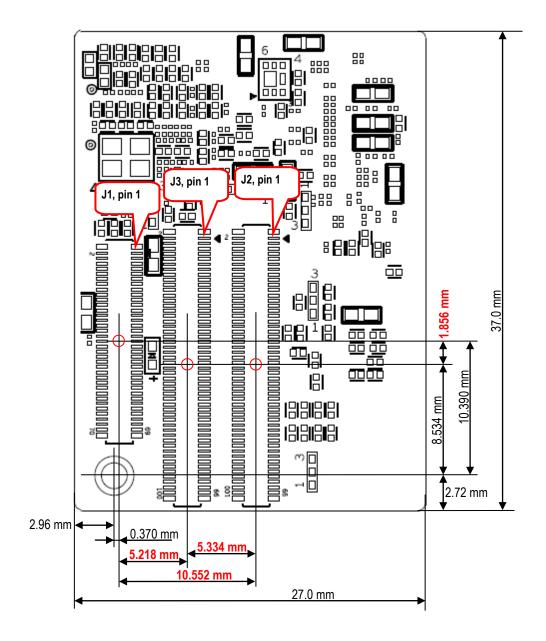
iMX7 Dual uCOM Board Mechanical Outline, Seen From Bottom Side
